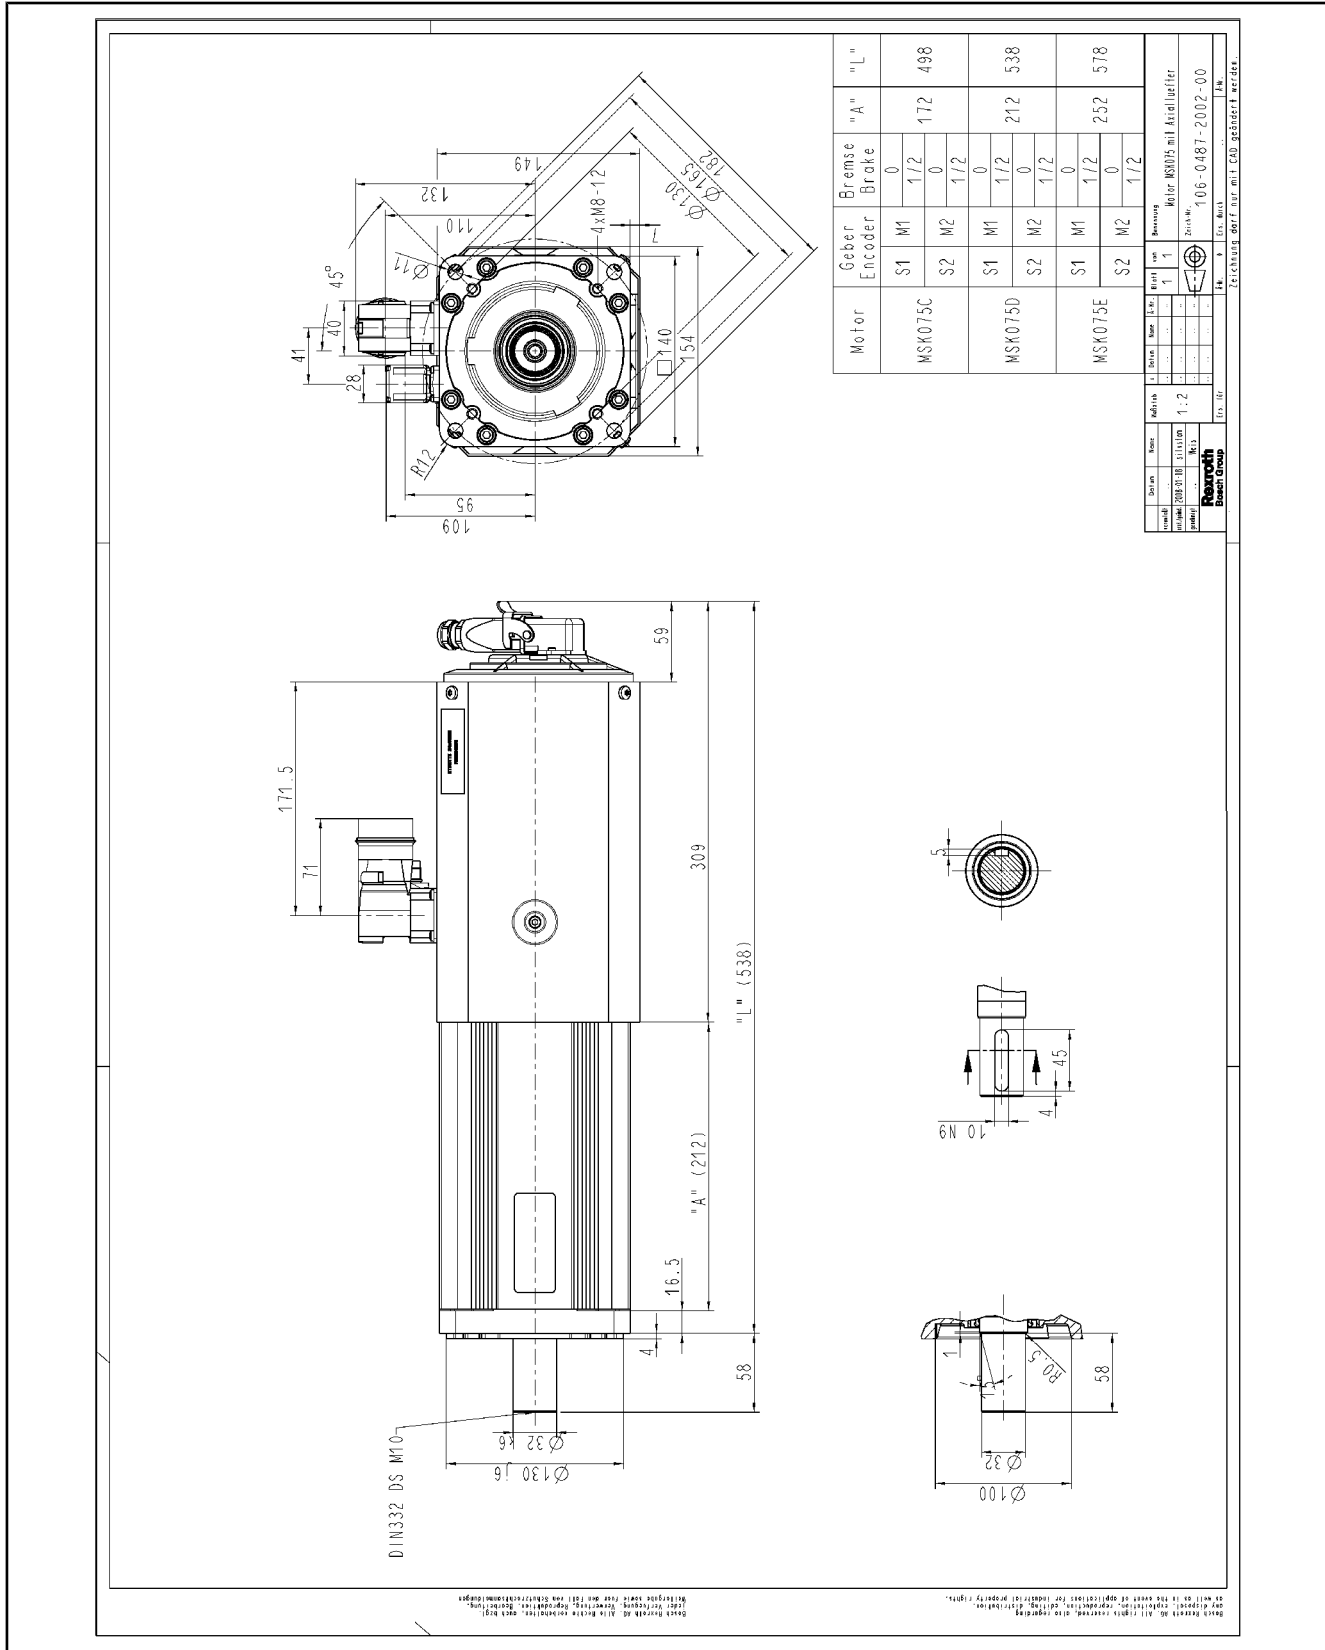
Dimension sheet MSK075 with axial fan unit
